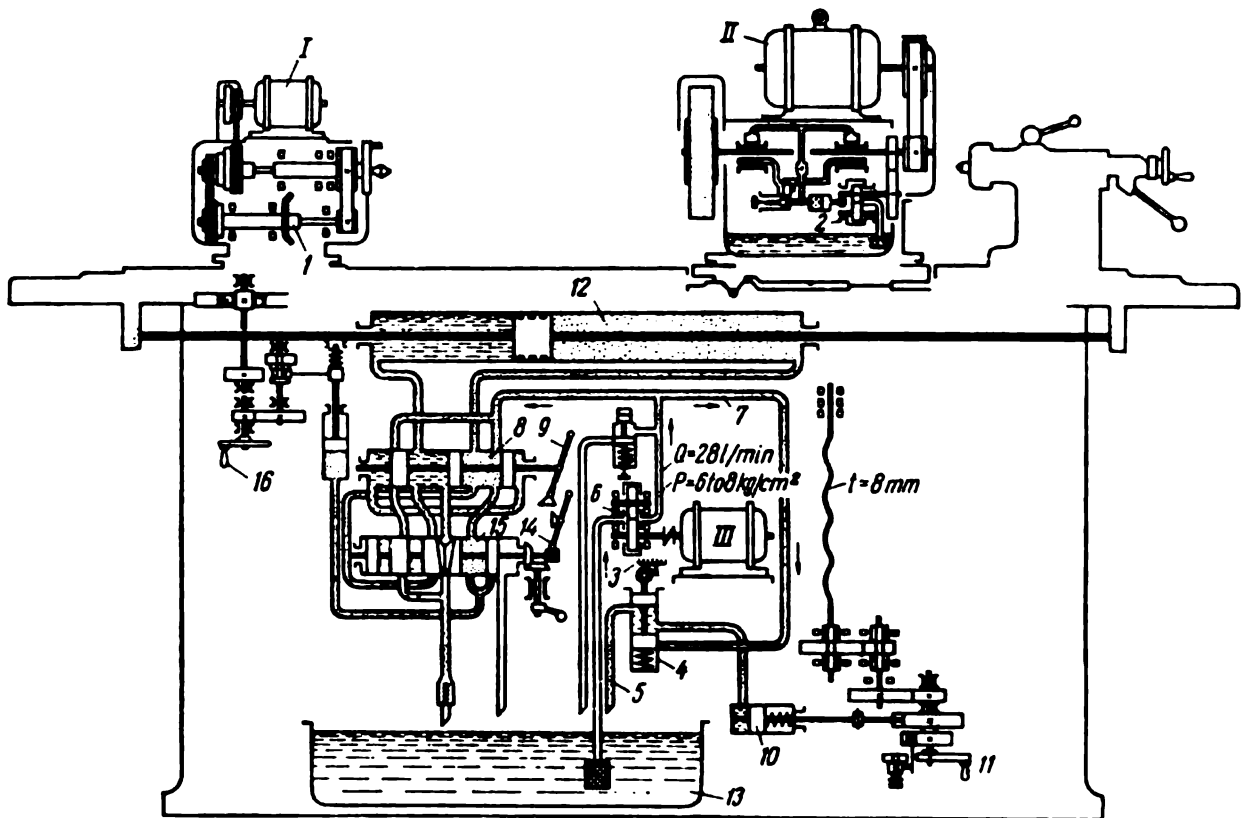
Combined gearing and hydraulic system diagram of the model 315 cylindrical grinding machine:
